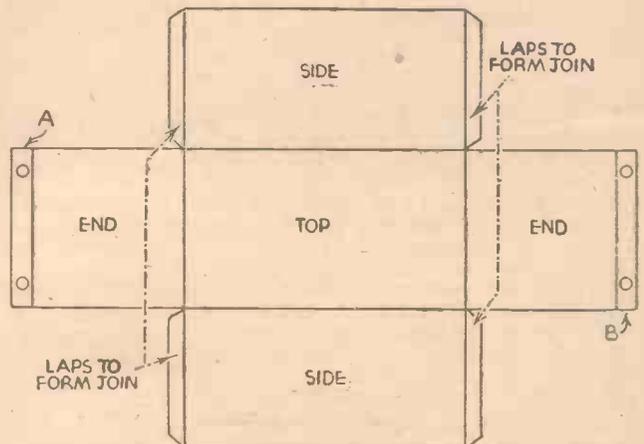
Developed blank for making the metal cover for the mains unit.
